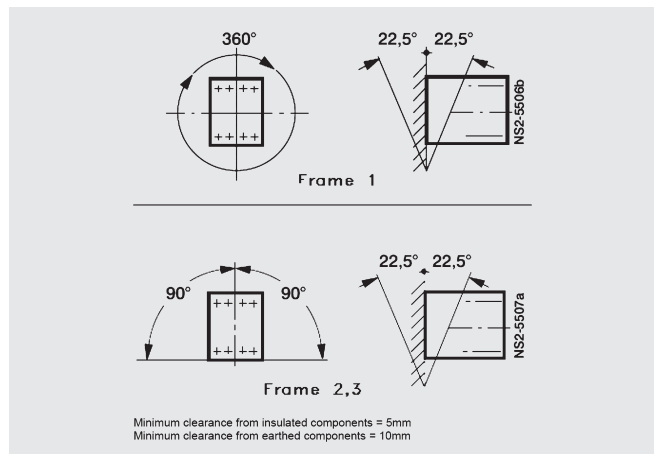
Mounting Positions for 3TS11... to 3TS15...
